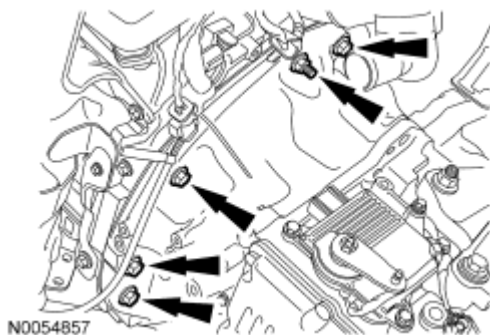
Locating Transaxle-To-Engine Stud Bolt & Transaxle-To-Engine Bolts
